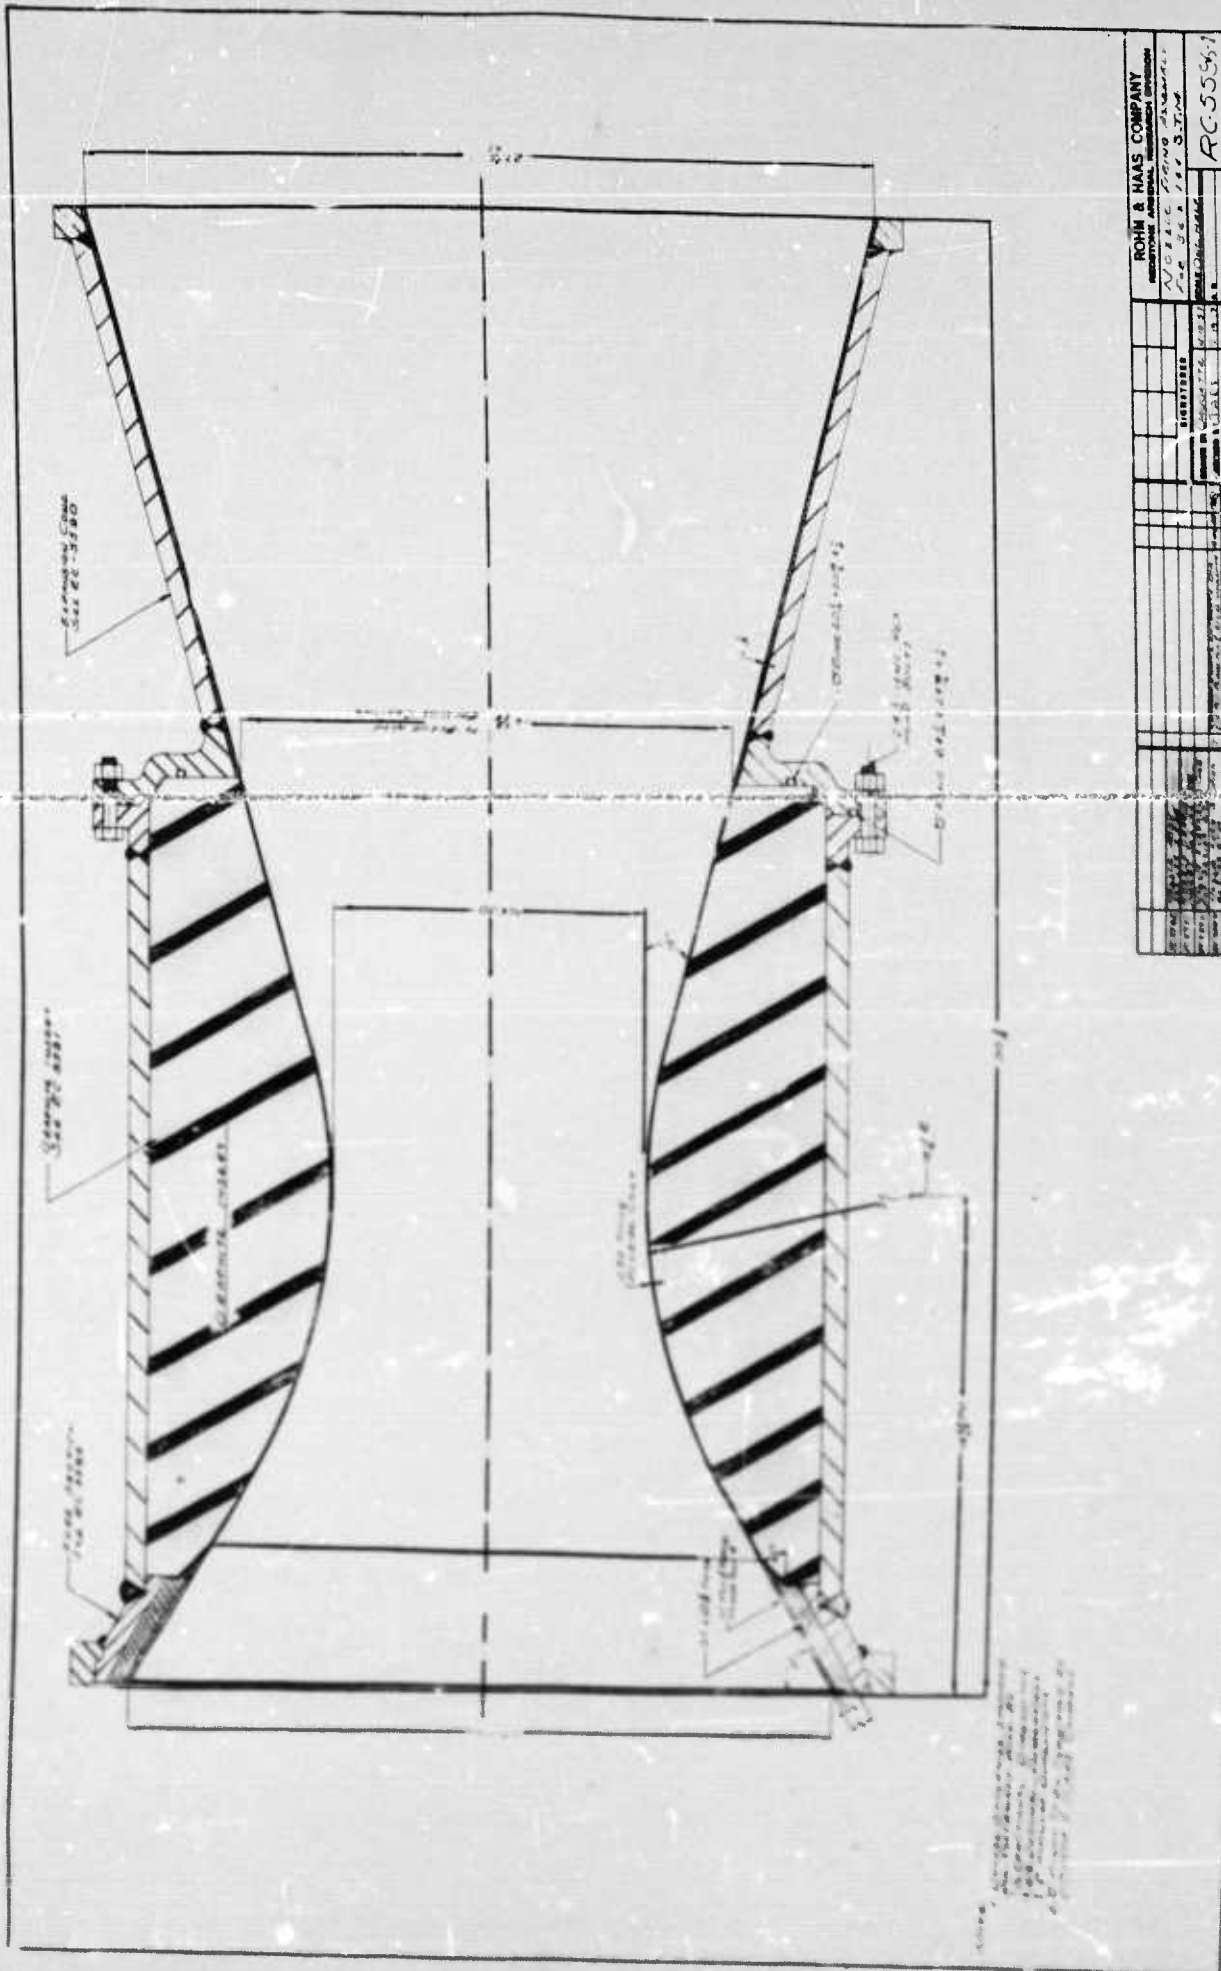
Nozzle firing assembly for Nike-Zeus Workhorse static test motor
